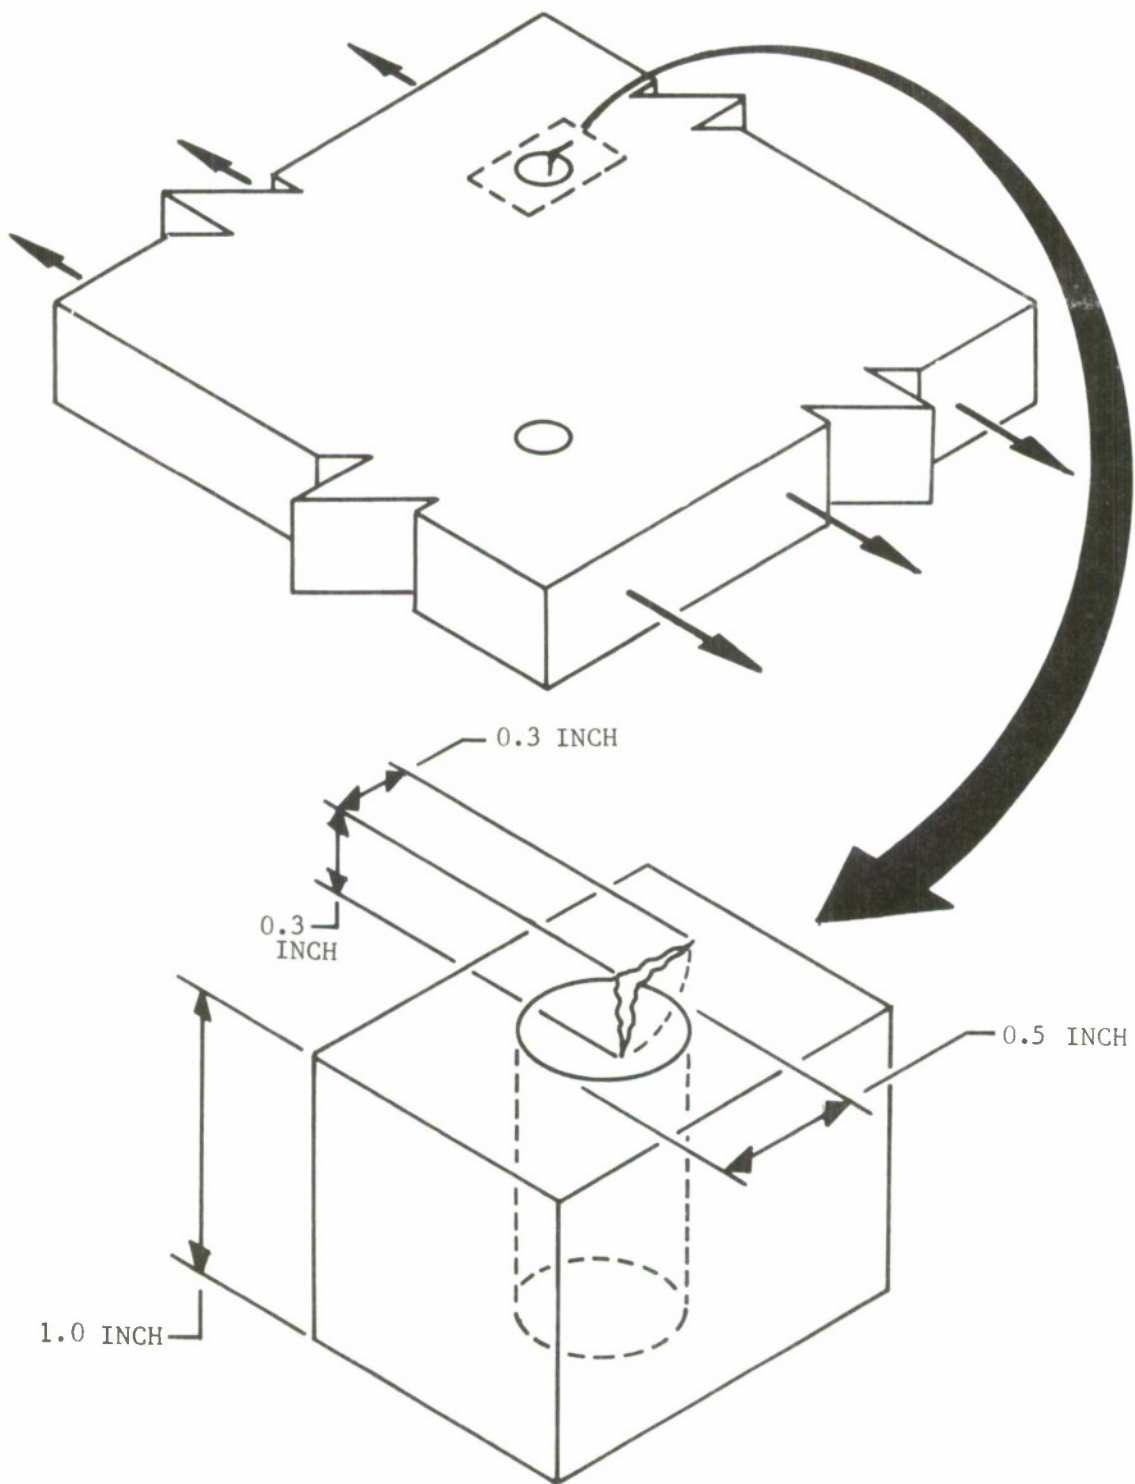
EXAMPLE PROBLEM - CORNER CRACK AT BOLT HOLE LOADED IN TENSION
